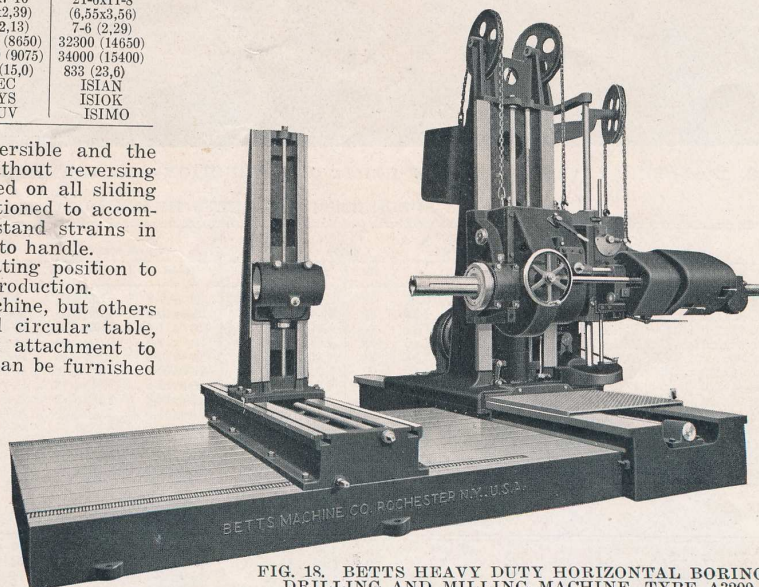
BETTS HEAVY DUTY HORIZONTAL BORING, DRILLING AND MILLING MACHINE, TYPE A3200
